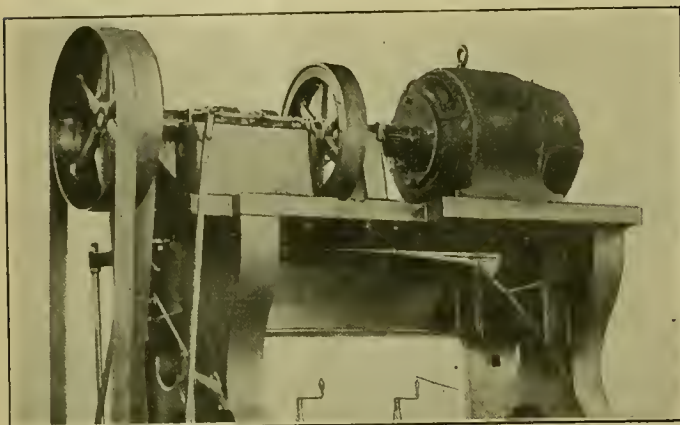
REAR VIEW OF THE GEARED DRIVE UPON THE CINCINNATI PLANER, SHOWING GEAR BOX, AND ALSO THE HEAVY FLYWHEEL.
